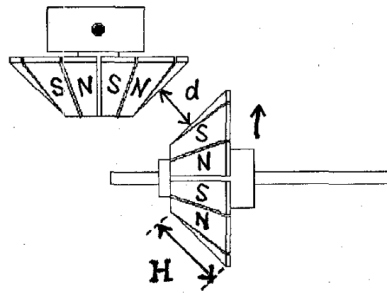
Perpendicular-axis magnetic spur gear[10]
